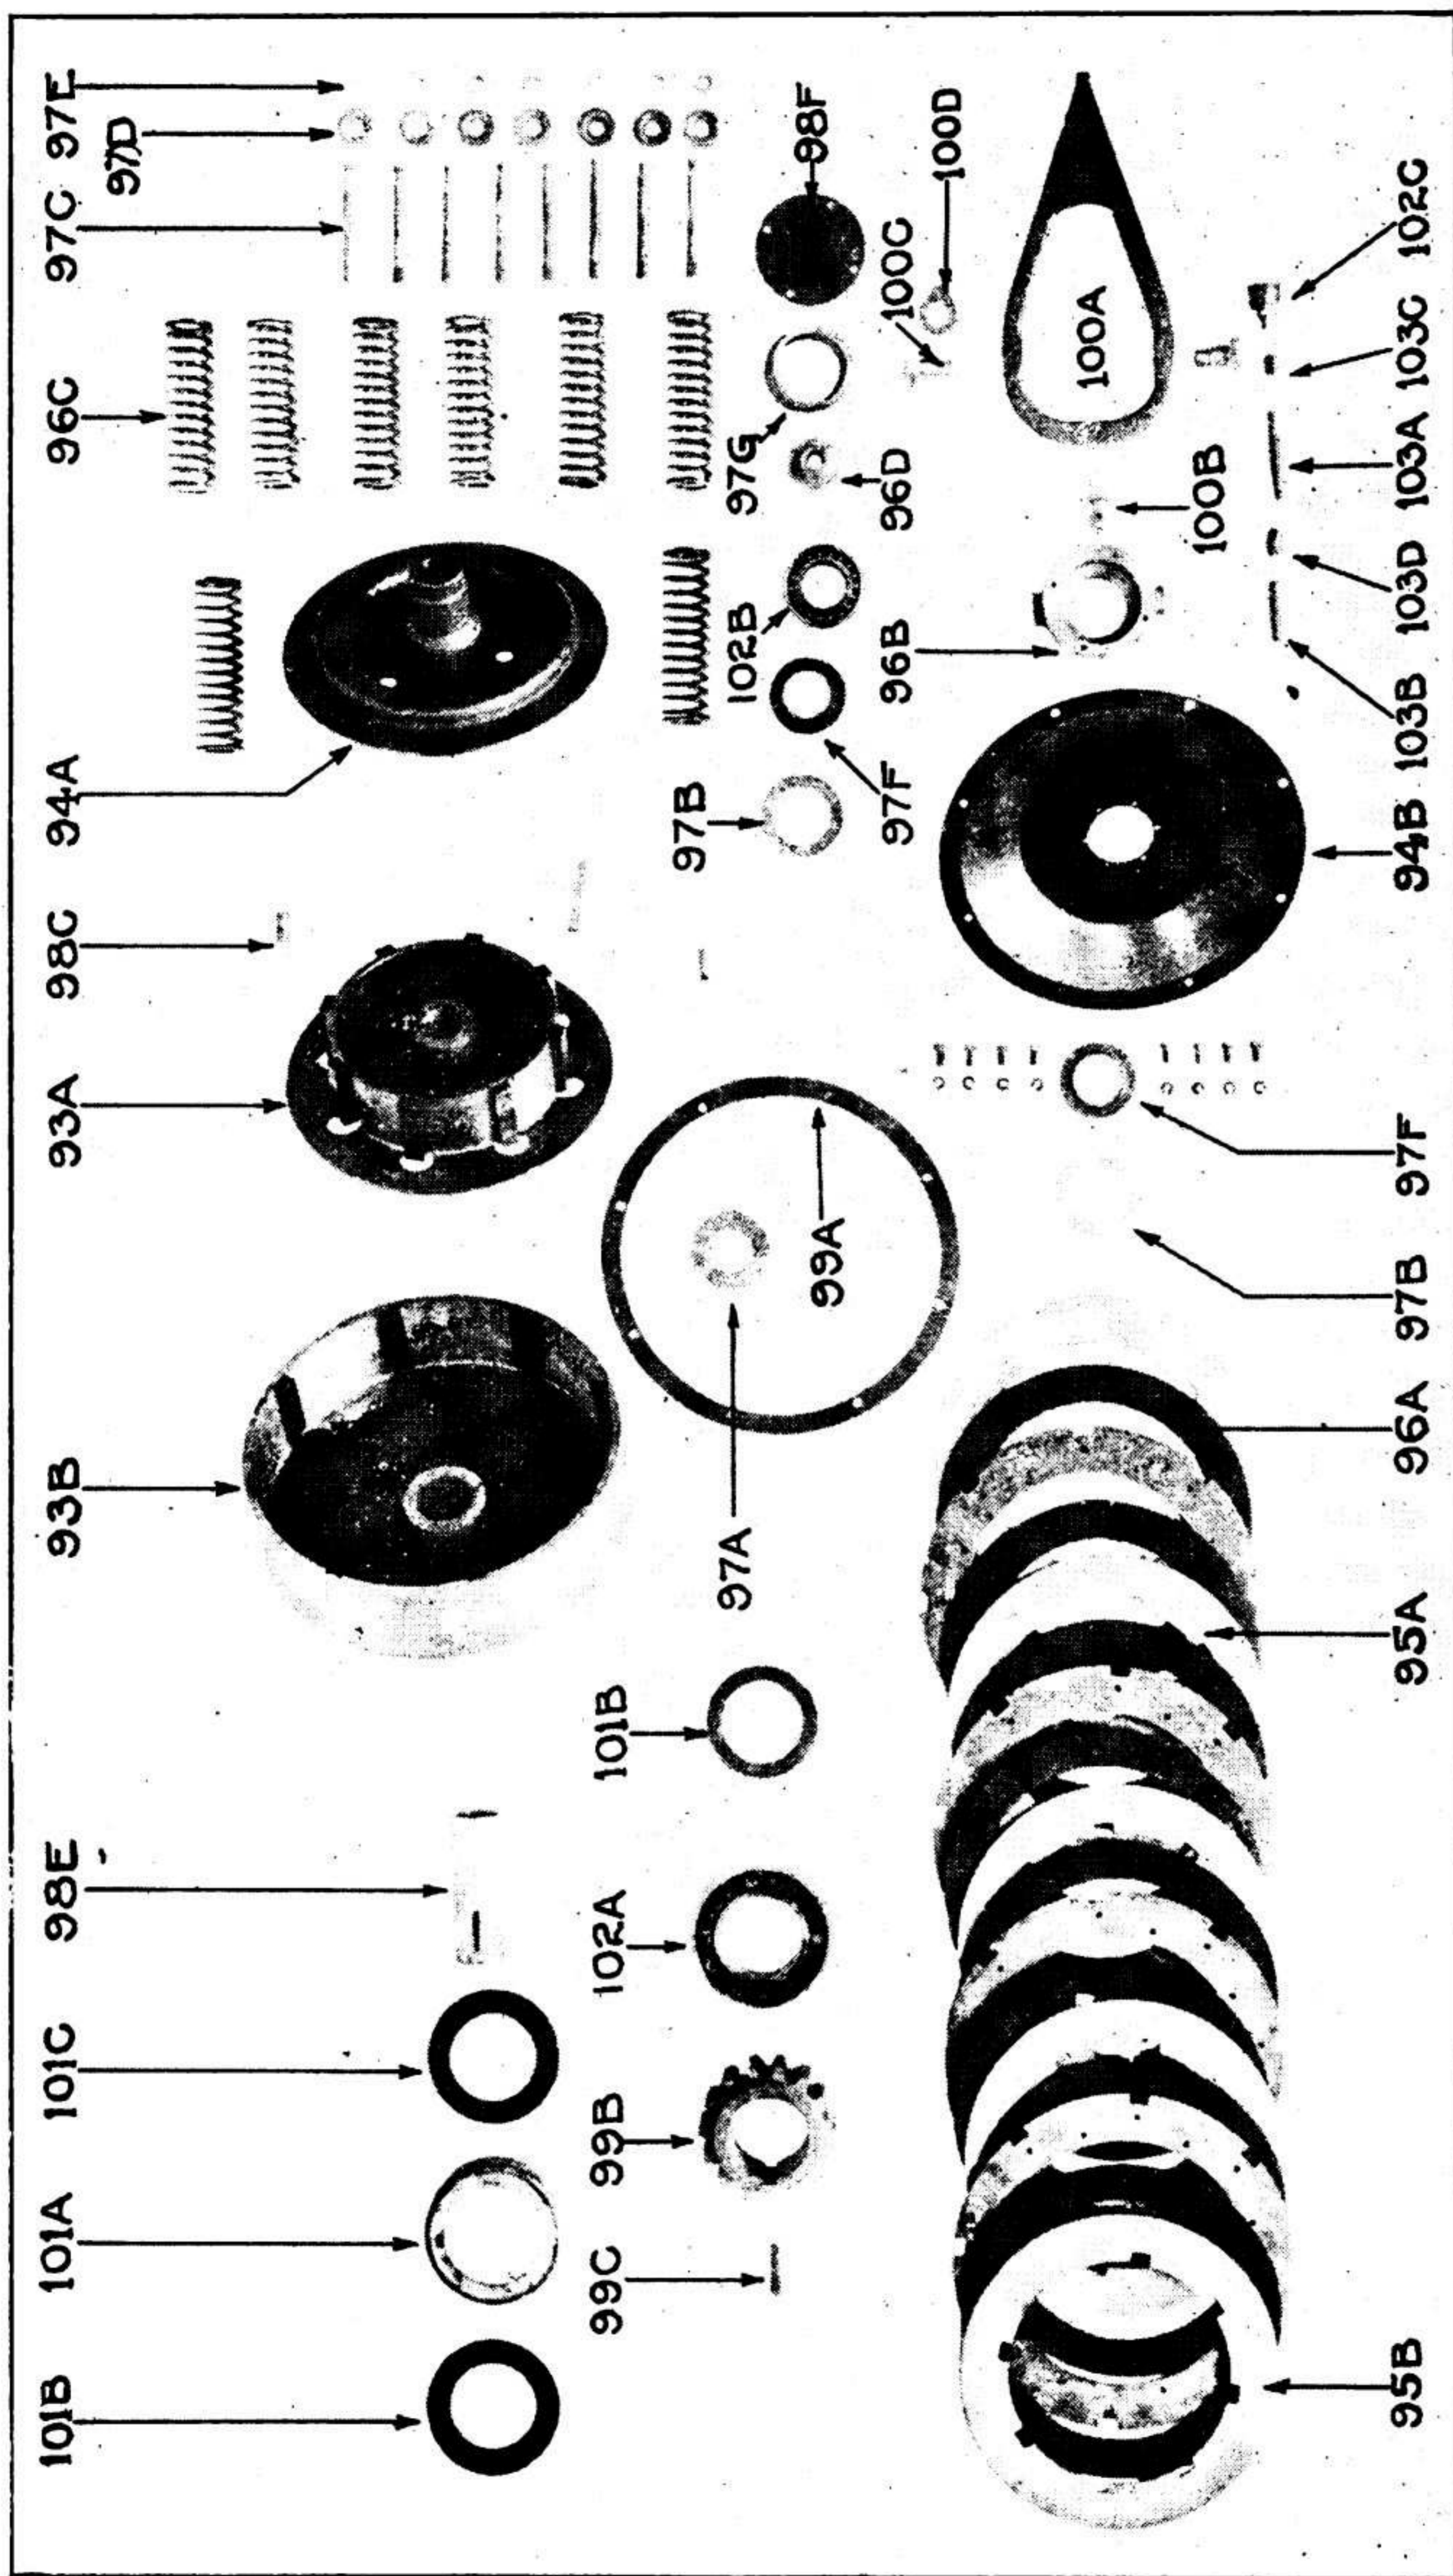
STEERING CLUTCH SHAFT ASSEMBLY
